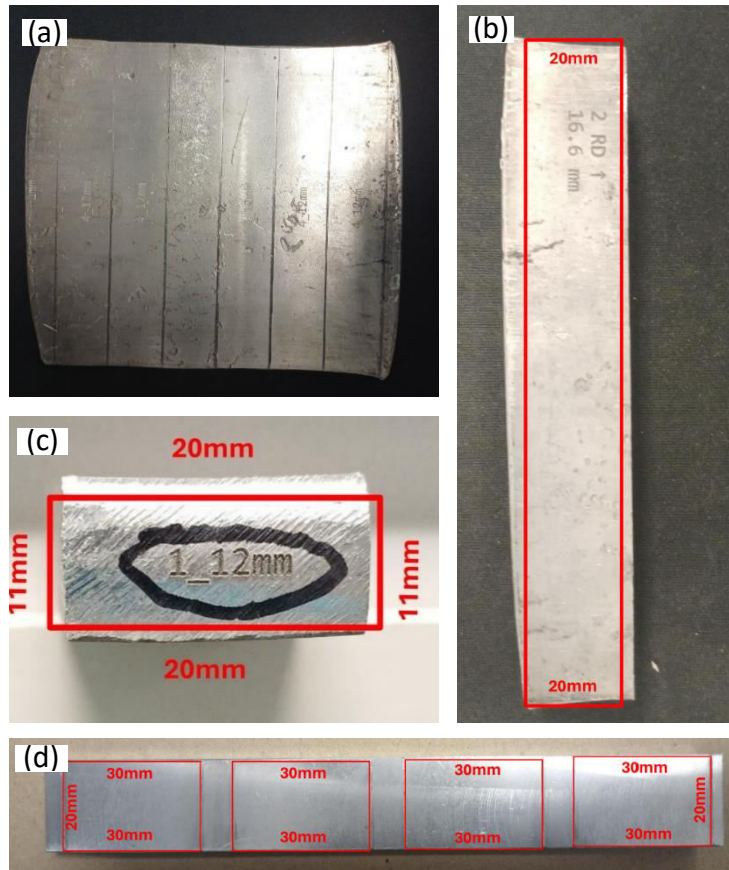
(a) 12 mm gauge rolled plate with 20 mm strips marked out. (b) 20mm strip cut off the rolled plate in (a). (c) 20 mm strip marked for skimming
